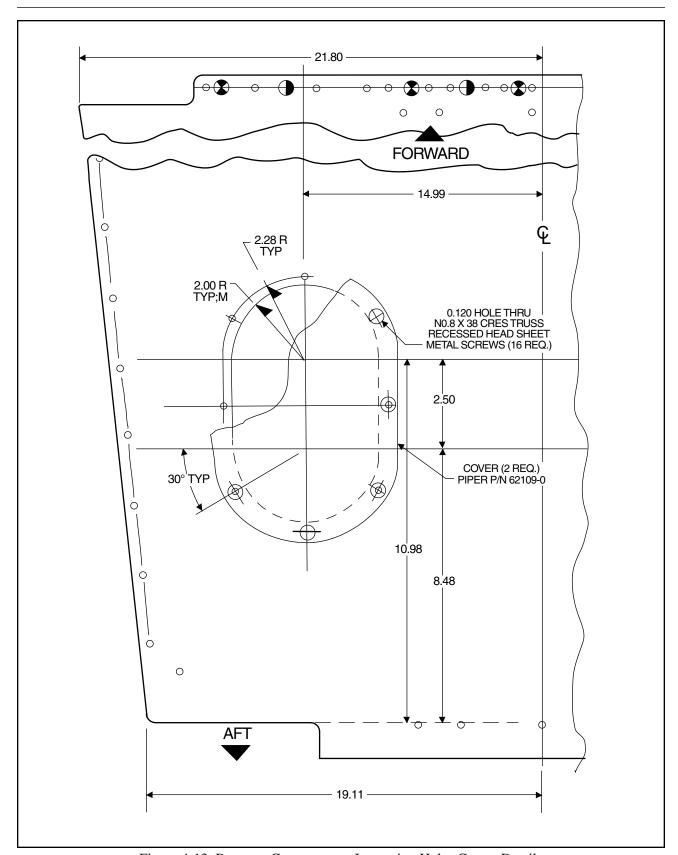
Baggage Compartment Inspection Holes Cutout Details
